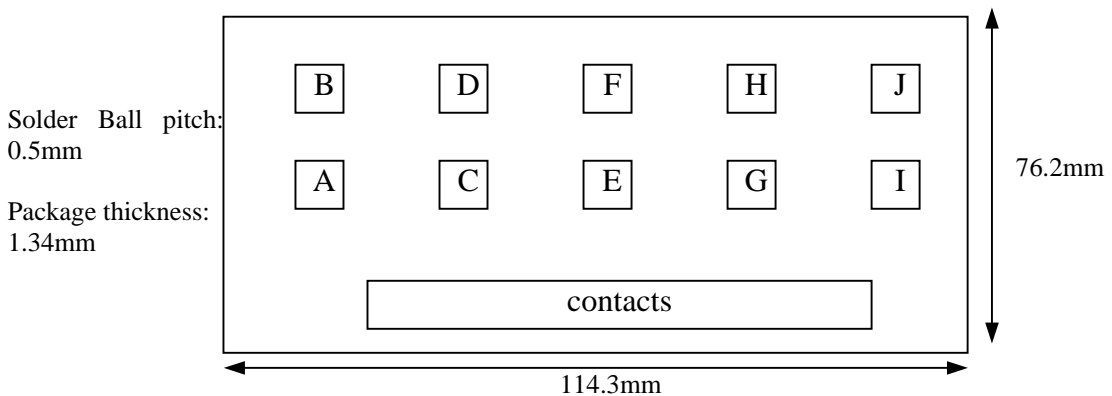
Mounting and labeling of CABGA components in the PCB
